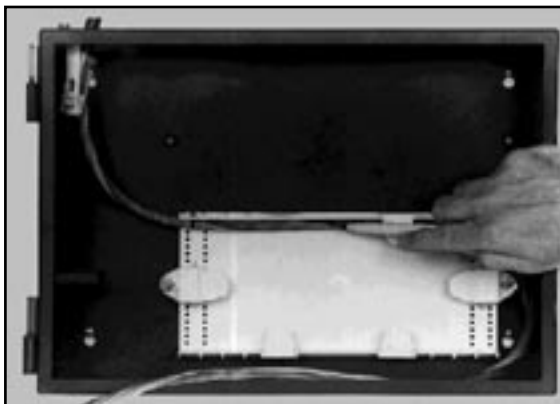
MARKING BUFFER TUBES OR UNITUBES
